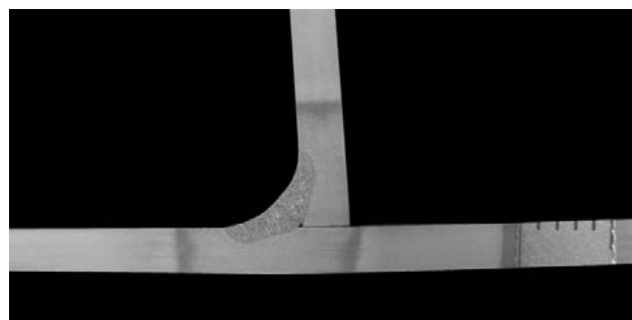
Incomplete weld root penetration caused by a displacement of the filler metal wire axis in relation to the weld axis
